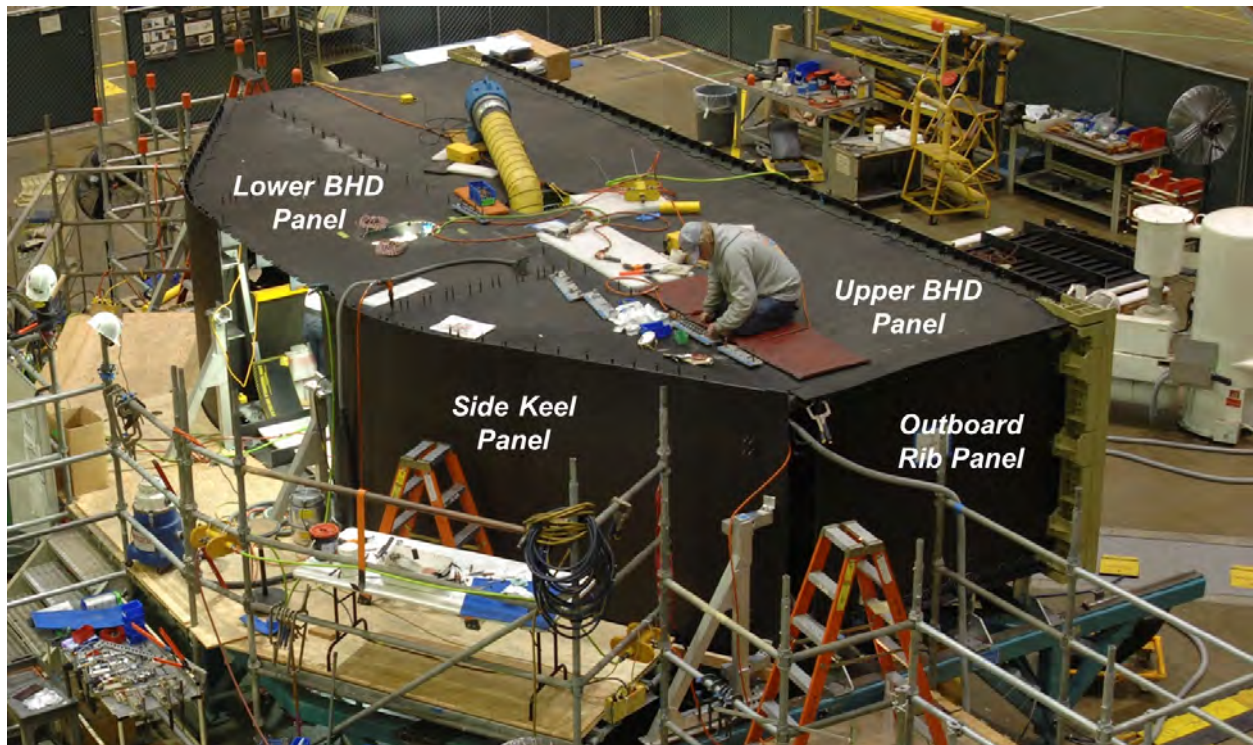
Lower Section Panel Assembly With Center Keel Panel Removed
